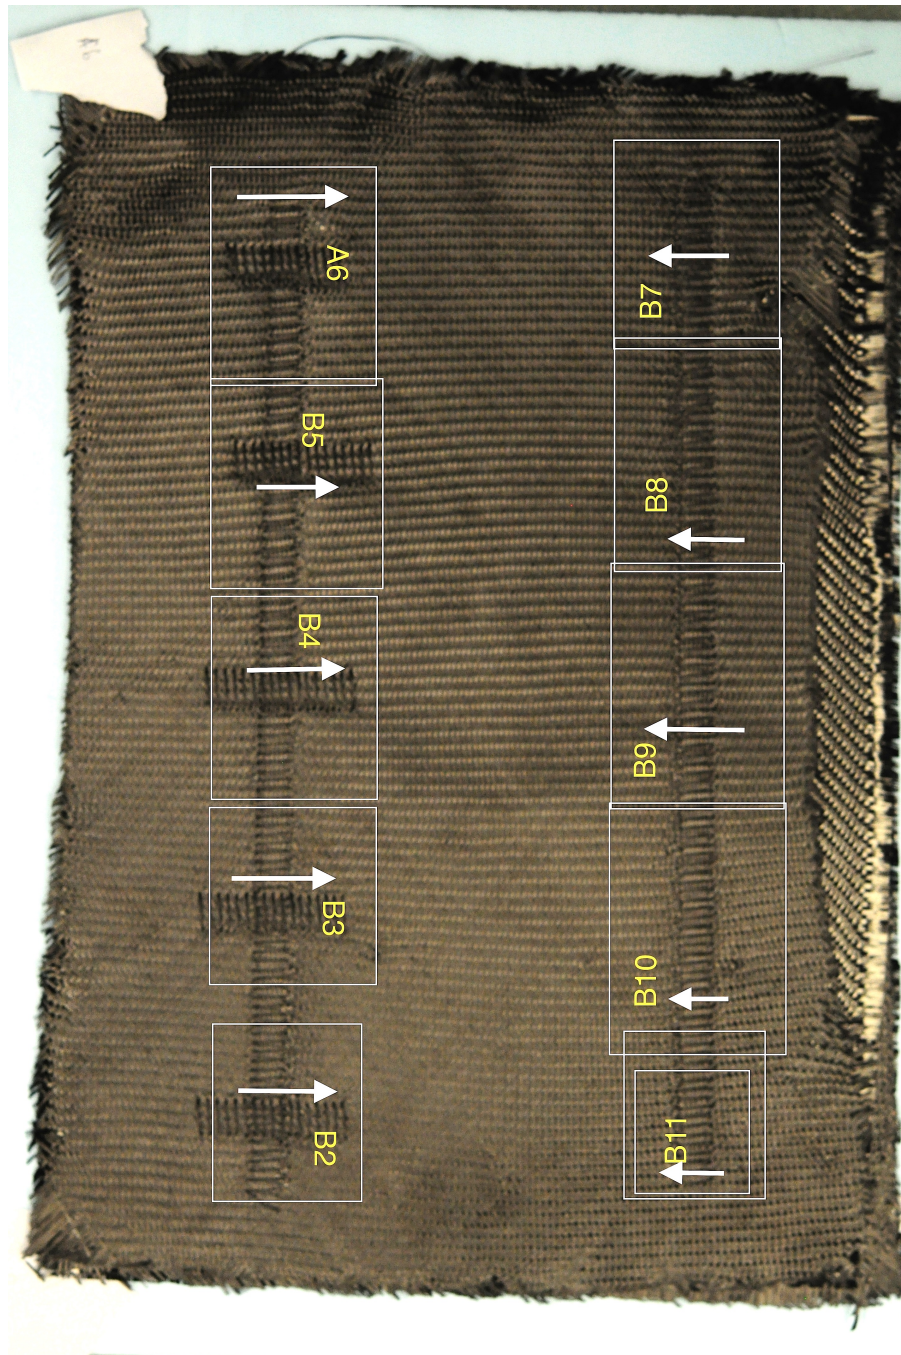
Backside overview of the '700-0005-p4' (4mm stitch) test preform, showing backside test sample designations and photo frame area.
